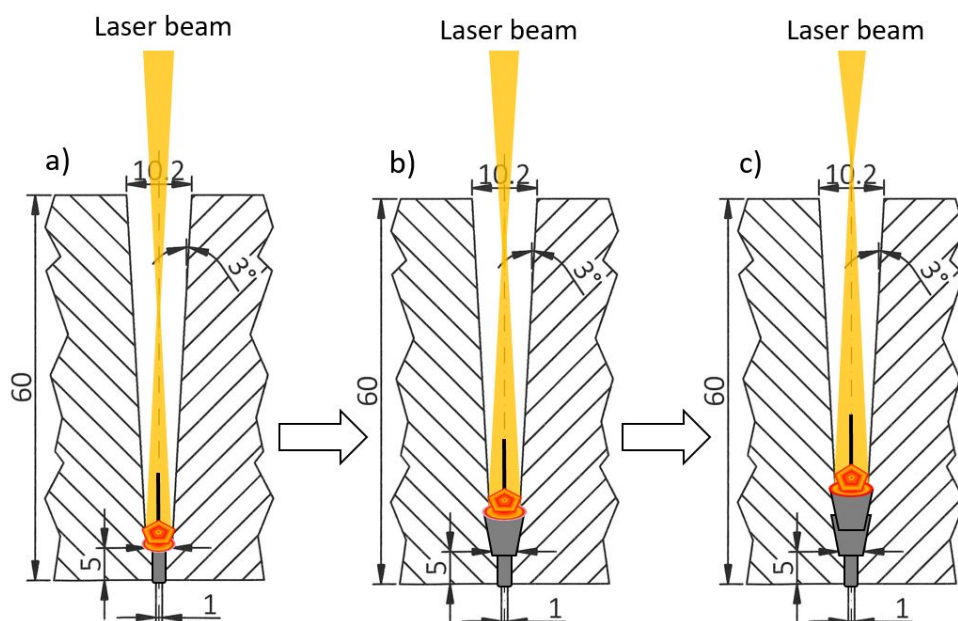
Drawing presenting a principle how laser-arc hybrid filling passes are produced in the case of multi-pass weld E2 presented in Publication II. Configurations for (a) the first fill up pass (F=+35); (b) the second fill up pass (F=+40); (c) the third fill up pass (F=+50).
